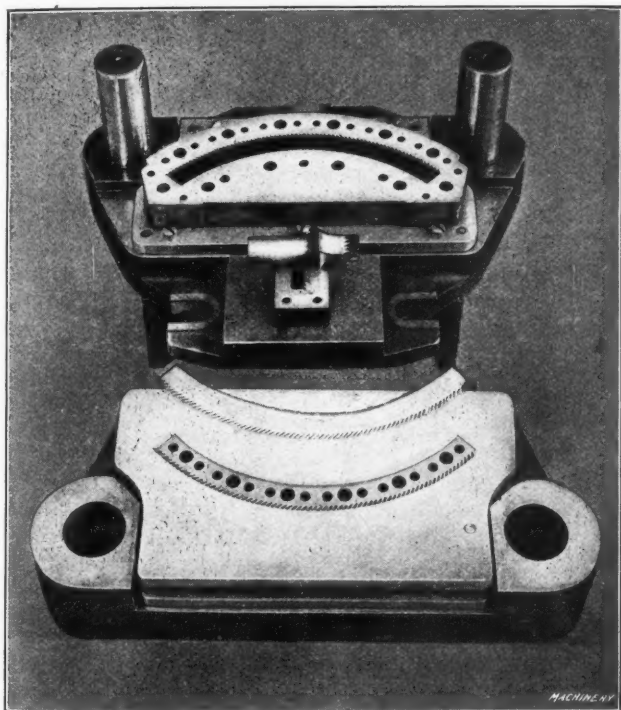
Punch and Die and Trial Tools for making Blank in Fig. 2
